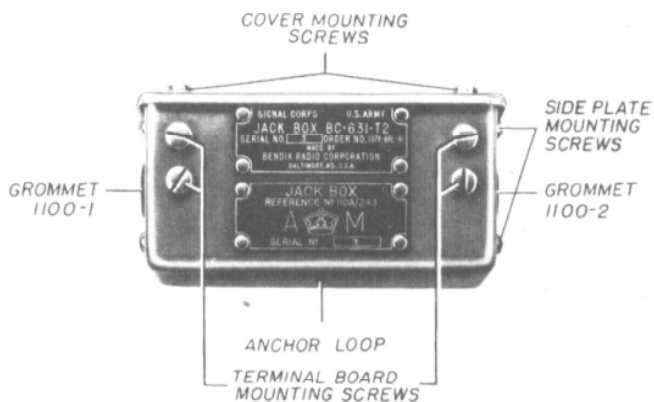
JACK BOX BC-631-A, FRONT VIEW
